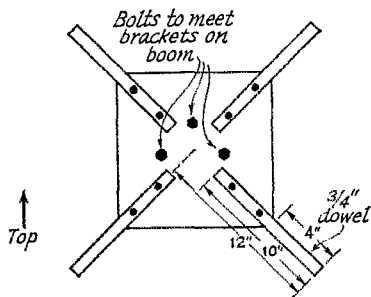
End spider (2 required) which bolts to bracket end of boom.
